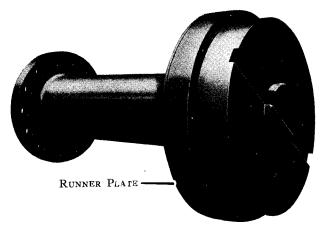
Typical Shaft and Runner for Umbrella Generator.
